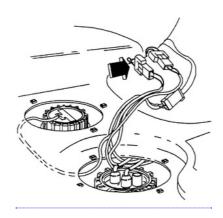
Using a socket wrench and tool 999-5486 or equivalent, remove the retaining ring and lift the sending unit out of the tank
